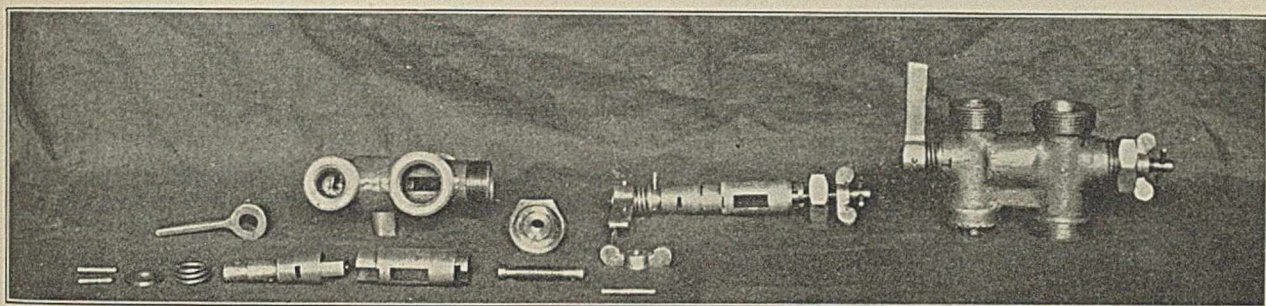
DOUBLE PORTED ADJUSTABLE MIXING VALVE; COMPLETE AT THE RIGHT AND IN VARIOUS STATES OF ASSEMBLY AT OTHER POINTS
